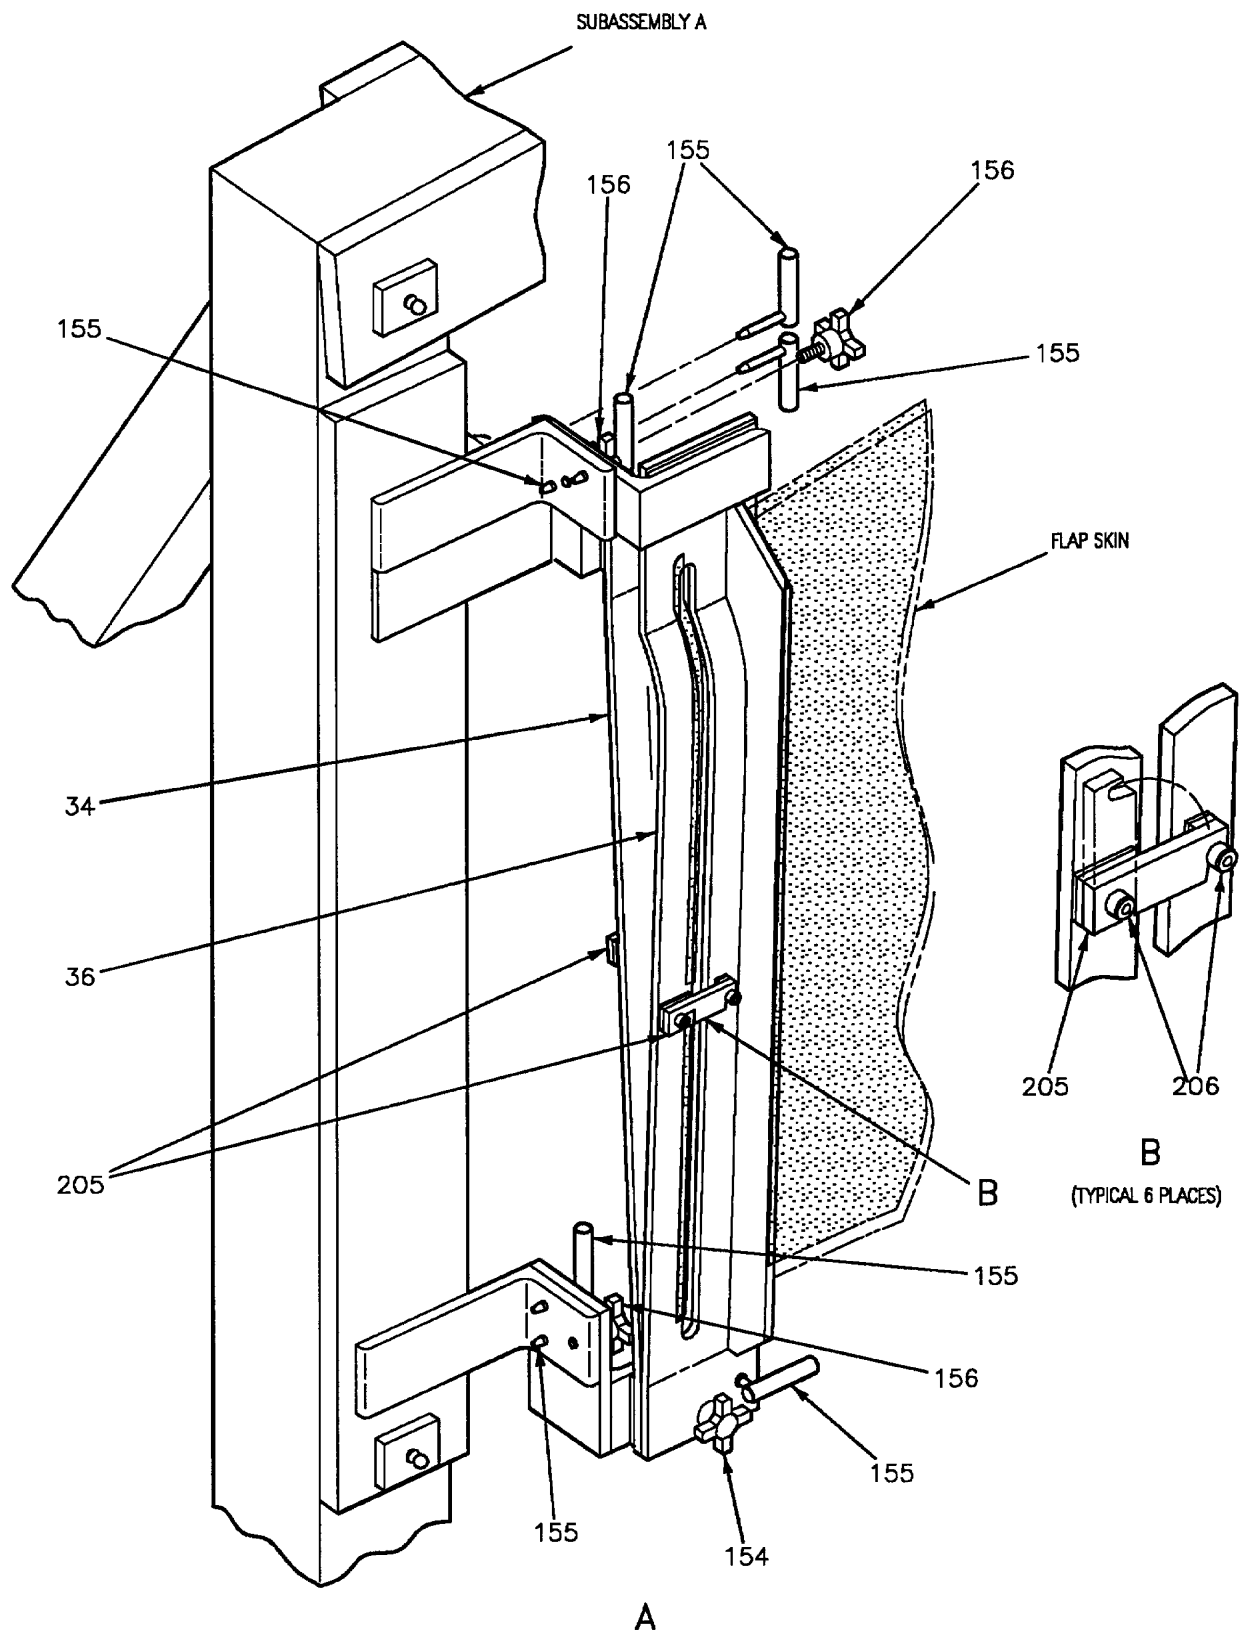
Trimming Upper and Lower Skins (Sheet 2)
